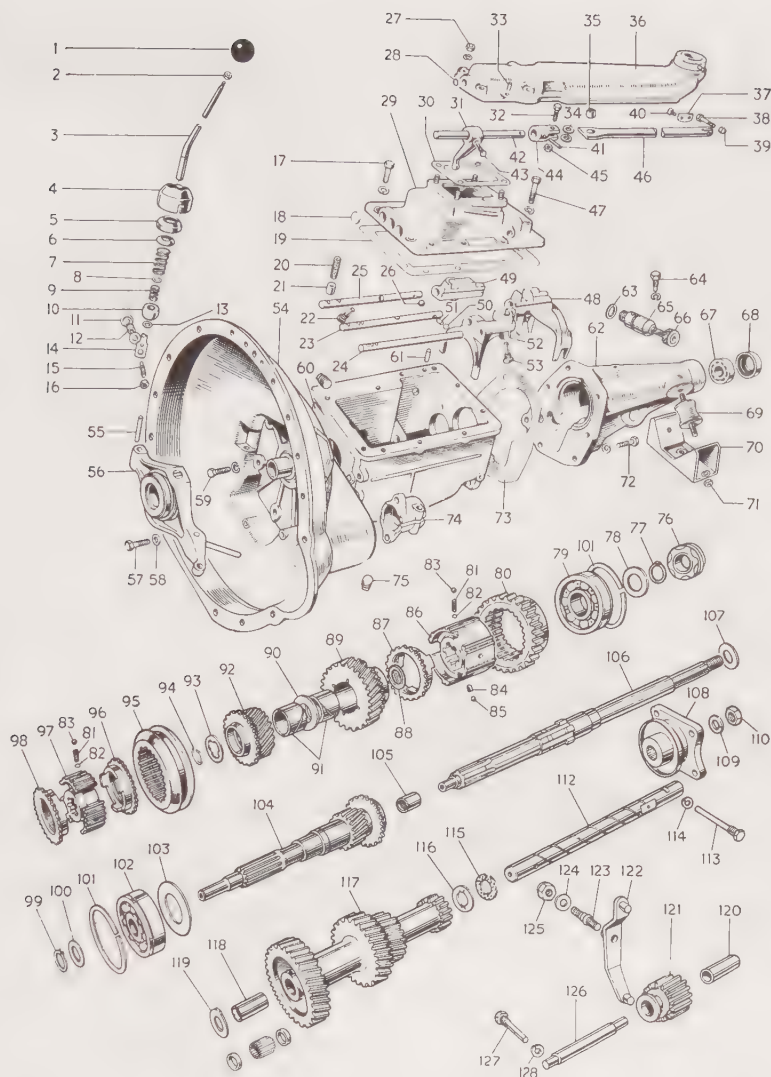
2 Components of gearbox. Type fitted to 1998 cc cars has synchromesh bottom gear, but construction is otherwise similar.
